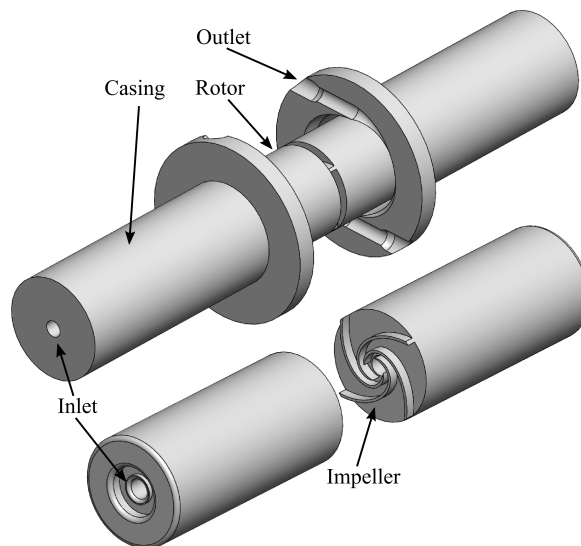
Solid model of the bearingless pump. (Above) Casing and rotor assembly (Below) Rotor with integrated impeller.
